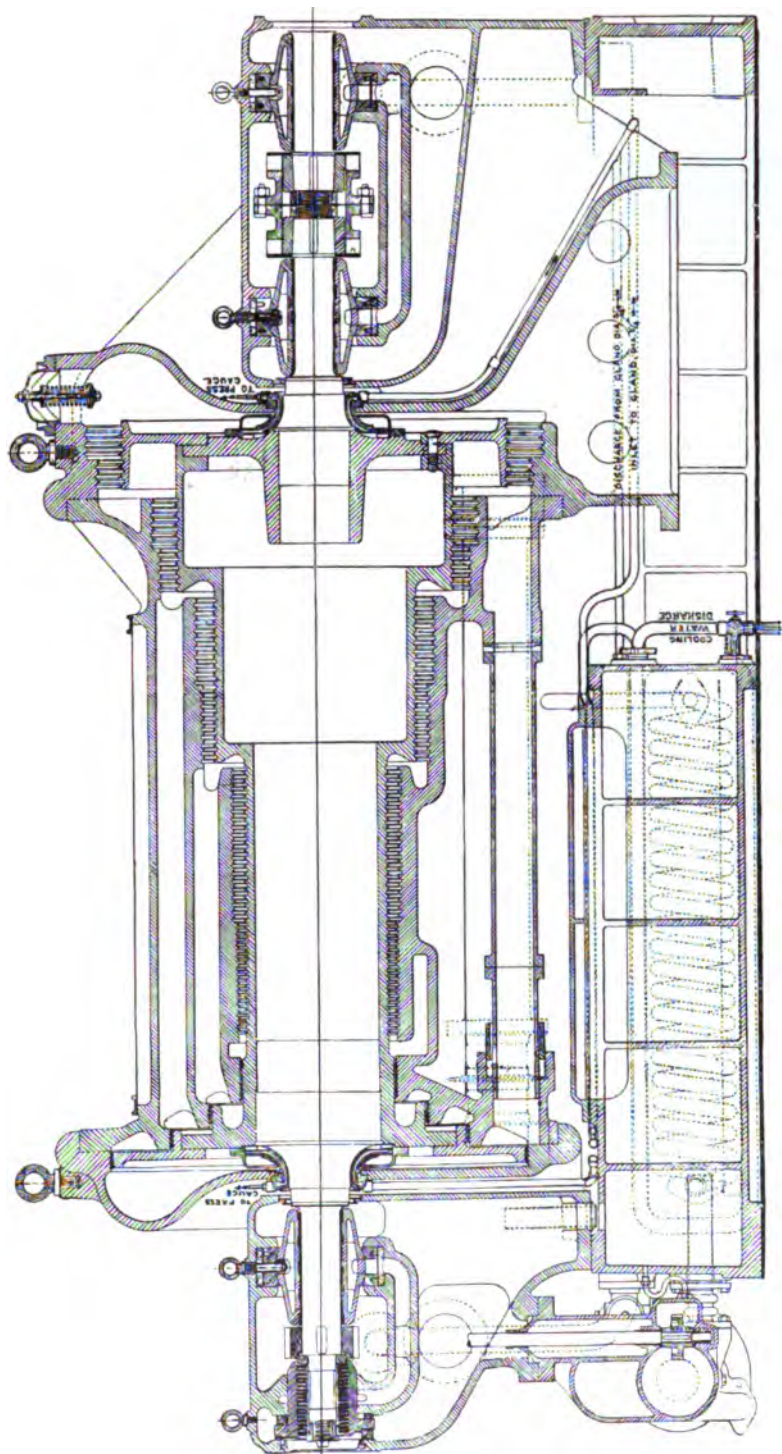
Longitudinal Section through 1000-K.W. Brush-Parsons Steam Turbine.
